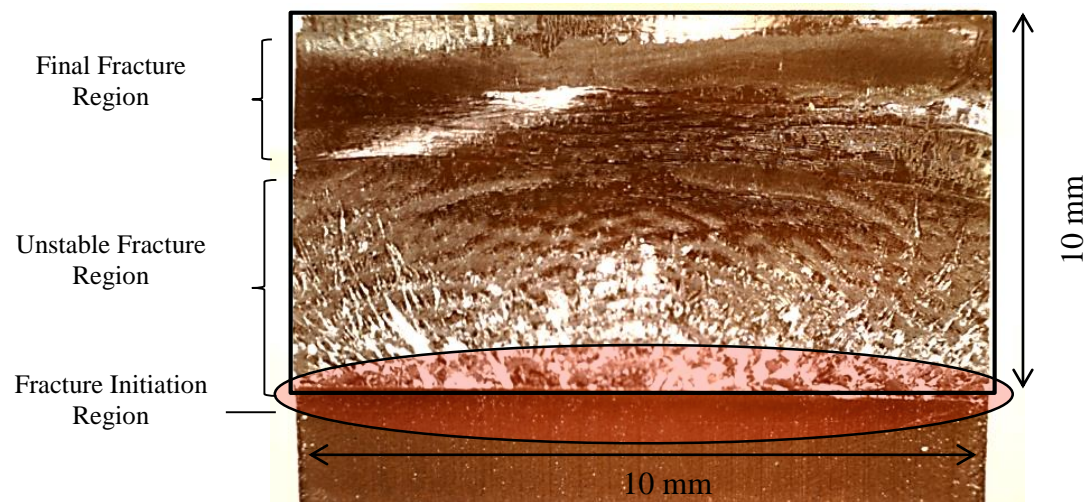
Macro-scale fracture surfaces of Ultem 1000 samples post Impact.
